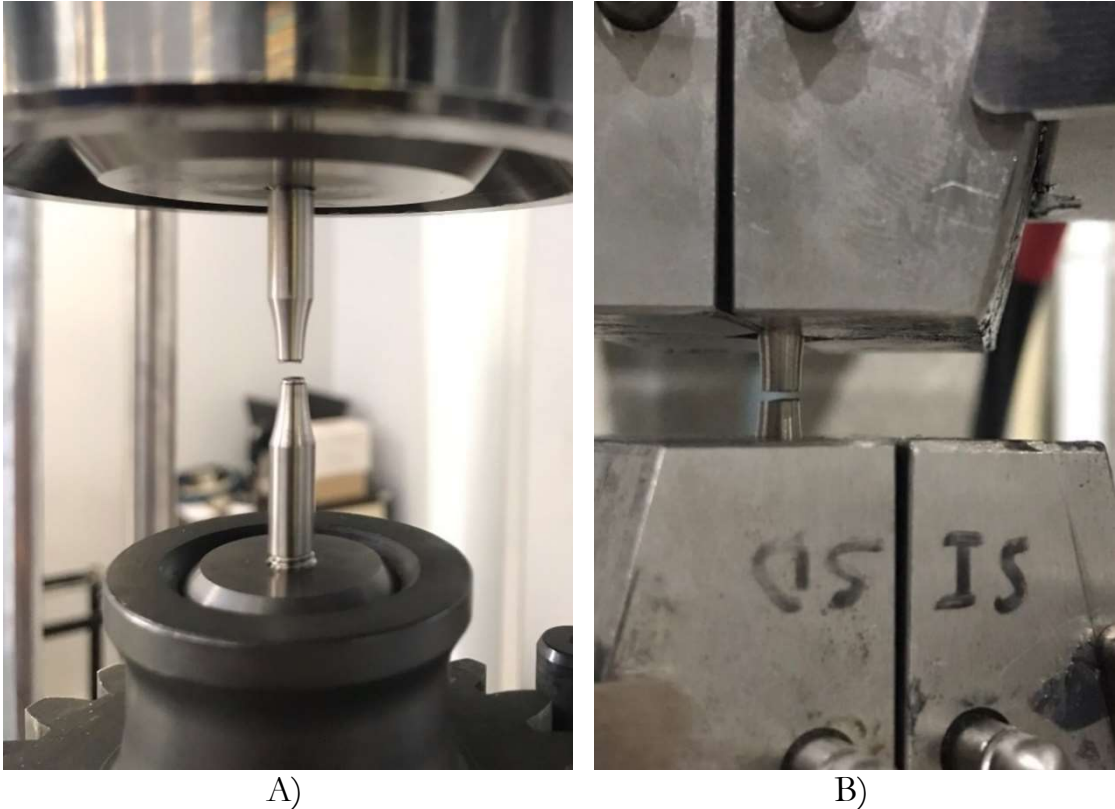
Specimen failures. A, Specimen with a non-negligible misalignment. B, Aligned specimen.
